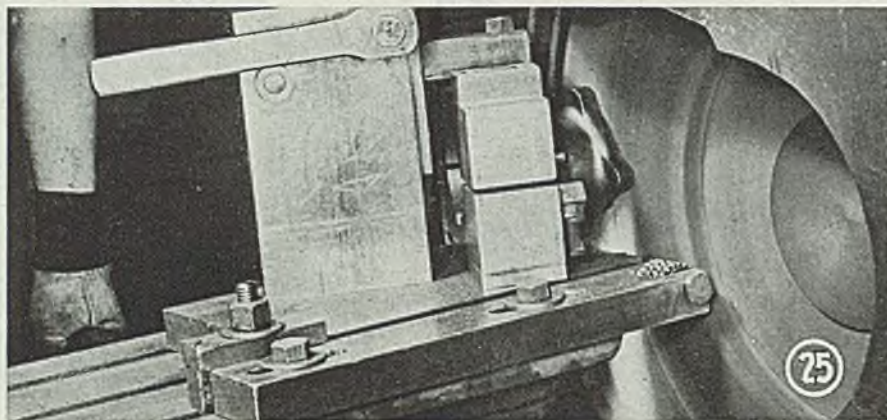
Castings passing rough inspection are sent to the grinding department where gate areas are smoothed and surface irregularities removed
